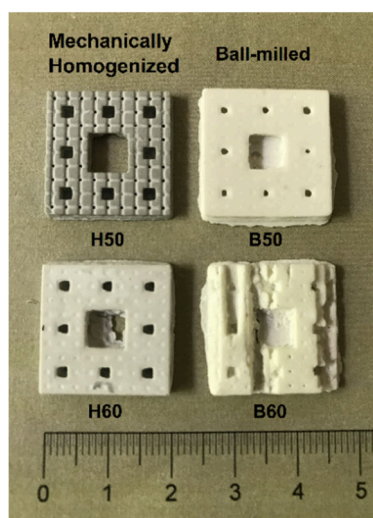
Printed samples via bottom-up approach; samples printed from suspensions H50, B50, H60 and B60
